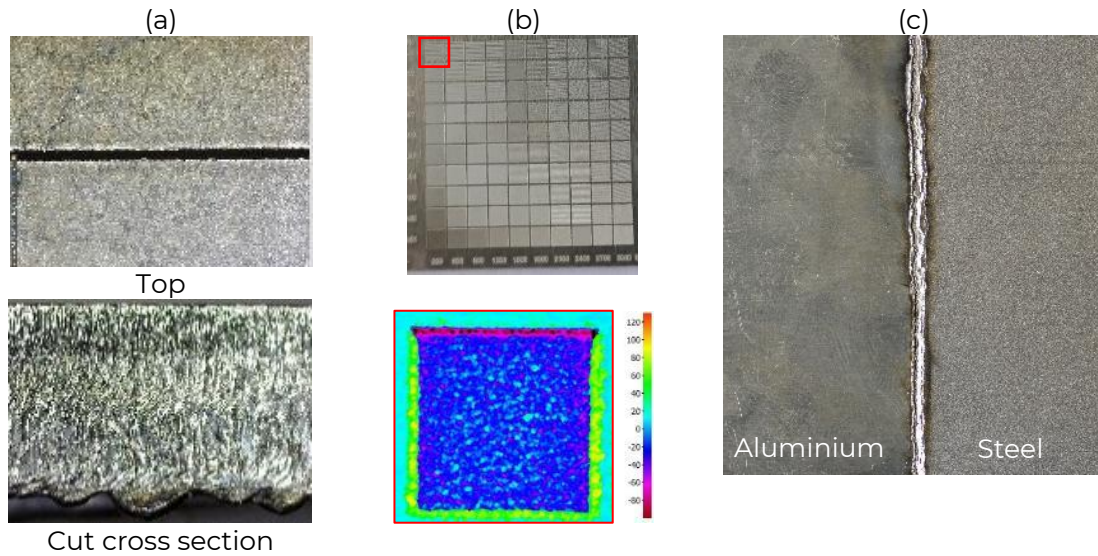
Multi-step laser manufacturing to producing initial dissimilar metal automotive joints, (a) laser cutting of 2.5 mm thick steel, (b) laser surfacing parameter optimisation on aluminium, (c) butt weld of aluminium to steel
